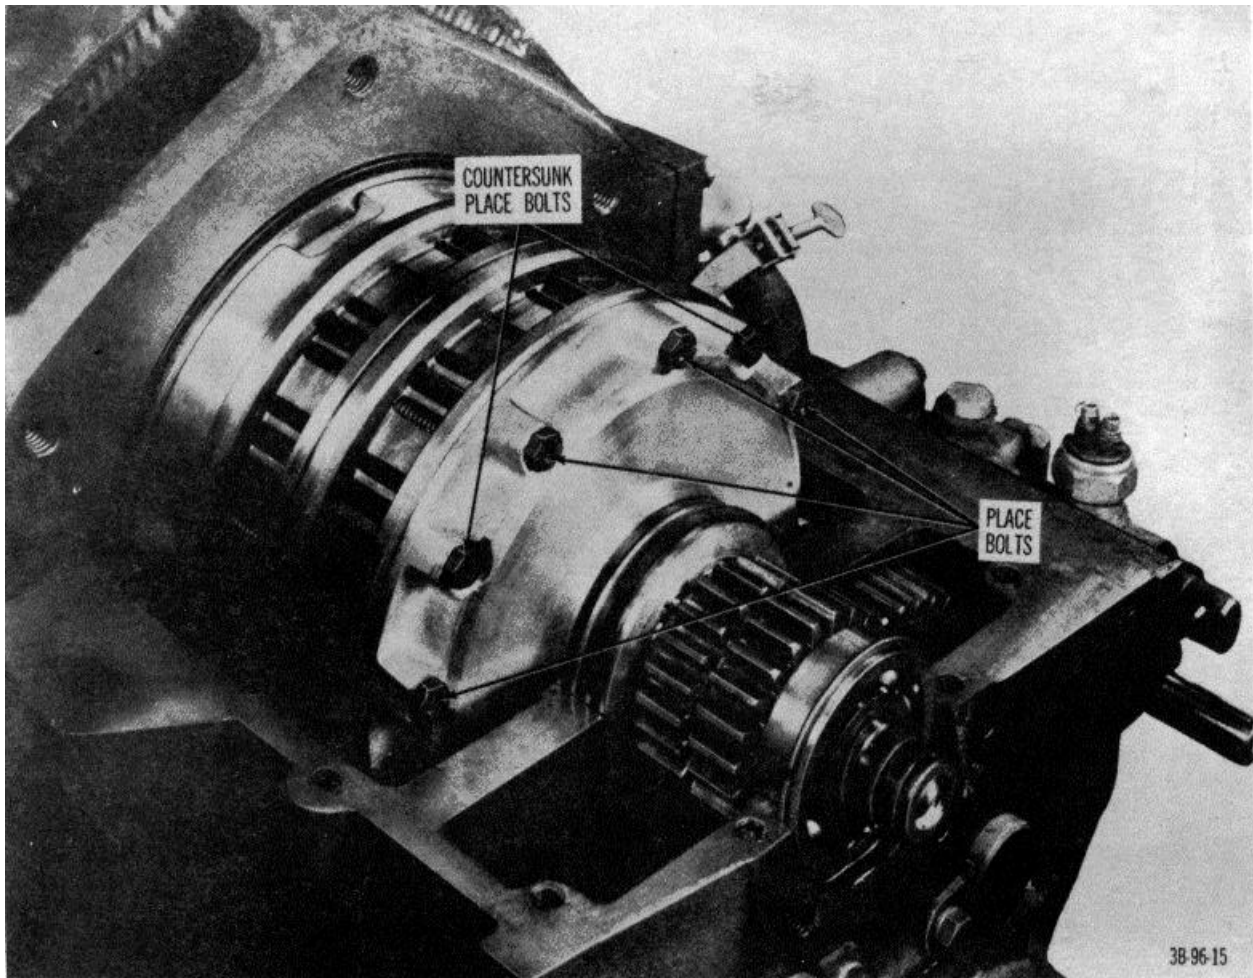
Forward-and-reverse clutch pack, mounted to drive plate.
